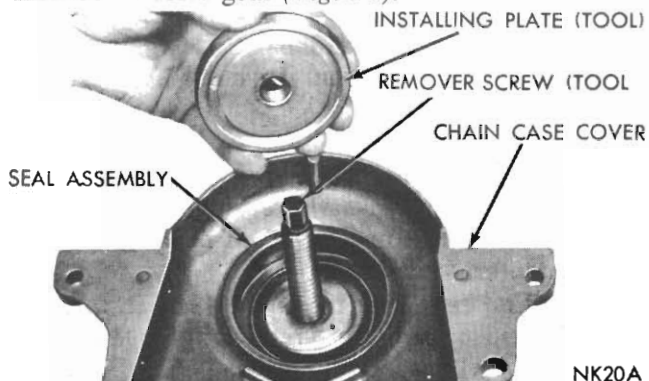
Positioning installer plate on a new seal (Tool E9C57A)
